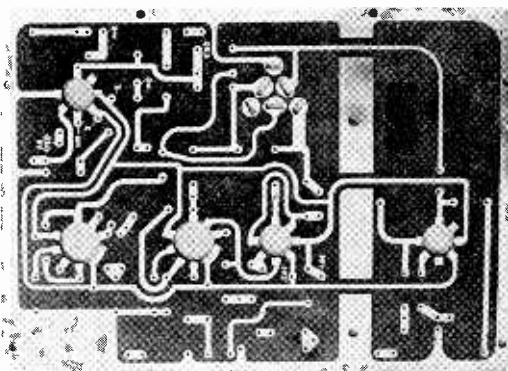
The printed circuit chassis of a modern 5-tube superheterodyne.
